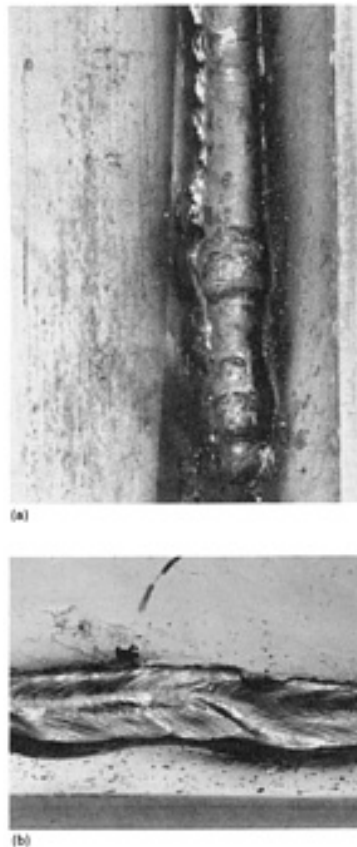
MACROGRAPHS SHOWING TOP VIEW OF FILLET WELDS. (A) VERTICAL WELD IN TYPE 304L STAINLESS STEEL (NOTE CONVEXITY OF BEAD AND NONUNIFORM REGIONS). (B) HORIZONTAL E 7024 WELD (NOTE WELD PLACEMENT AND LACK OF UNIFORMITY)
